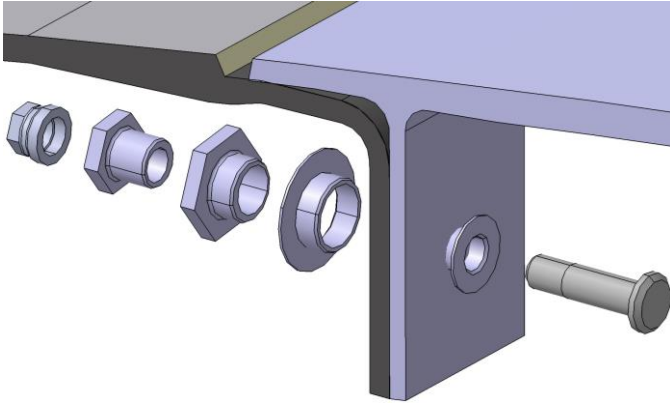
Detailed view of the fastener and eccentric bushings at the mechanical joint inside the structure.
